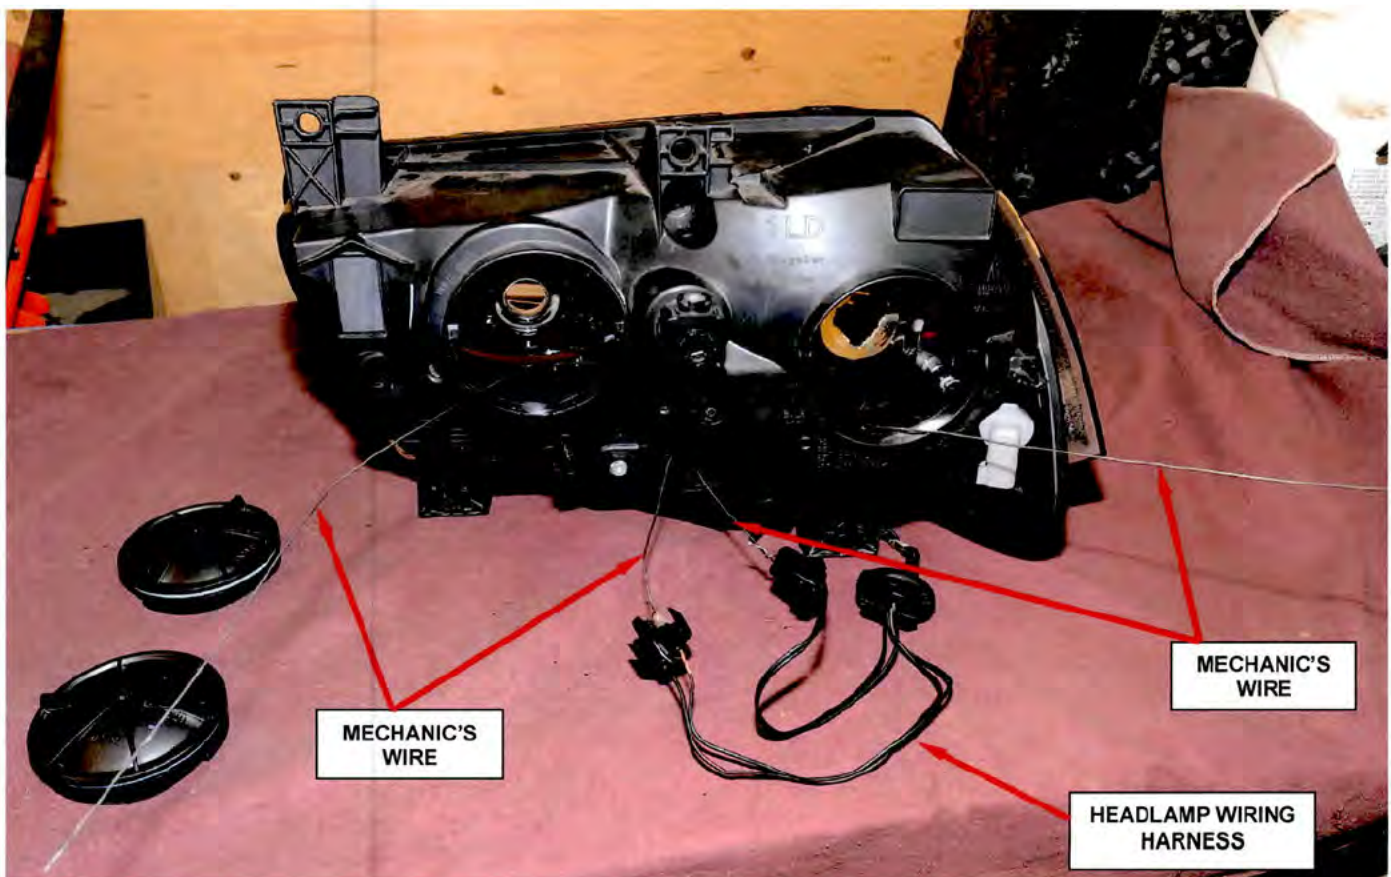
Remove Original Headlamp Wiring Harness from Headlamp Assembly
